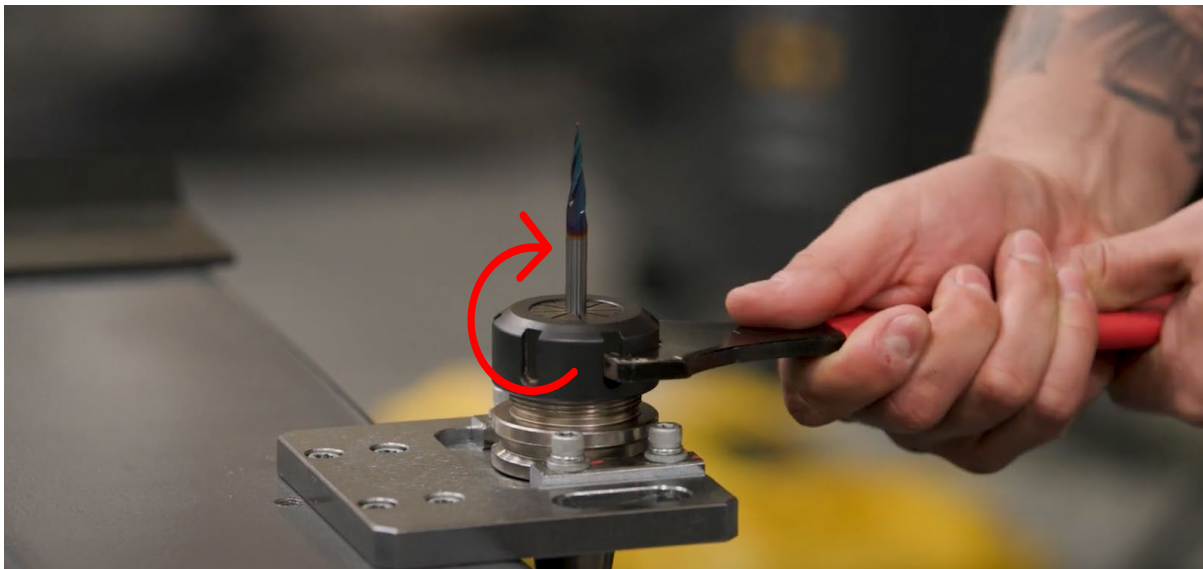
Tightening Spindle Nut with Spanner Wrench
